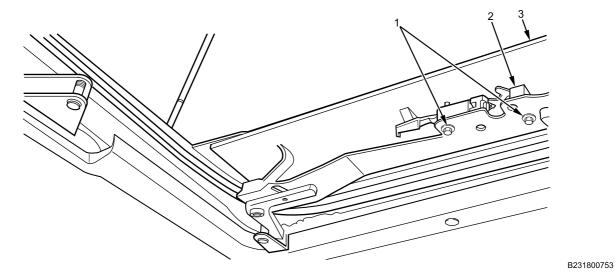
New Lock Assembly Aligned with Mounting Holes.
